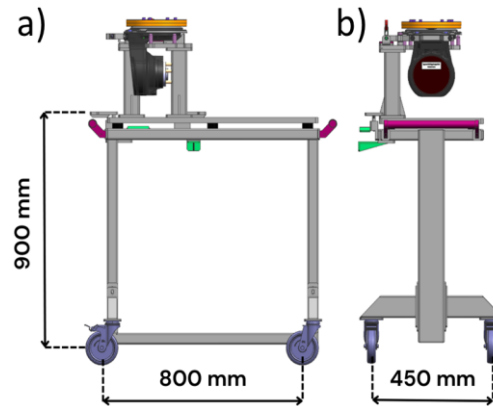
Test rig with the gearbox mounted on the dedicated assembly trolley: (a) side view showing the overall structure and main dimensions (height 900 mm, length 800 mm); (b) front view showing the trolley width (450 mm)
